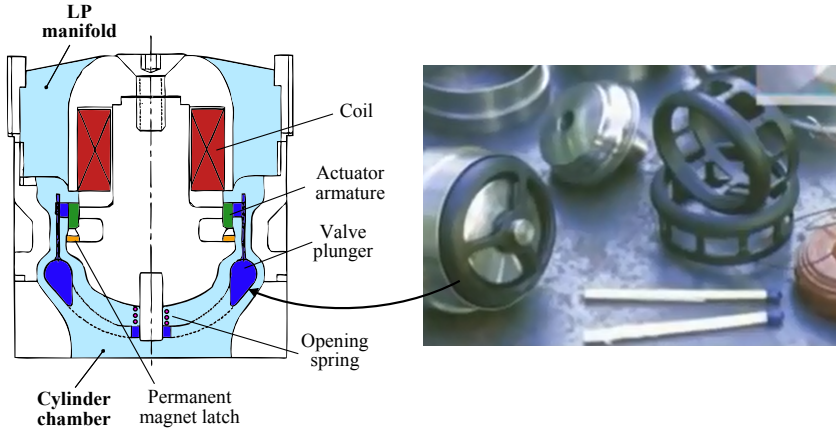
Annular shaped LPV for larger machines, with plunger manufactured in reinforced PEEK [49, 50].
